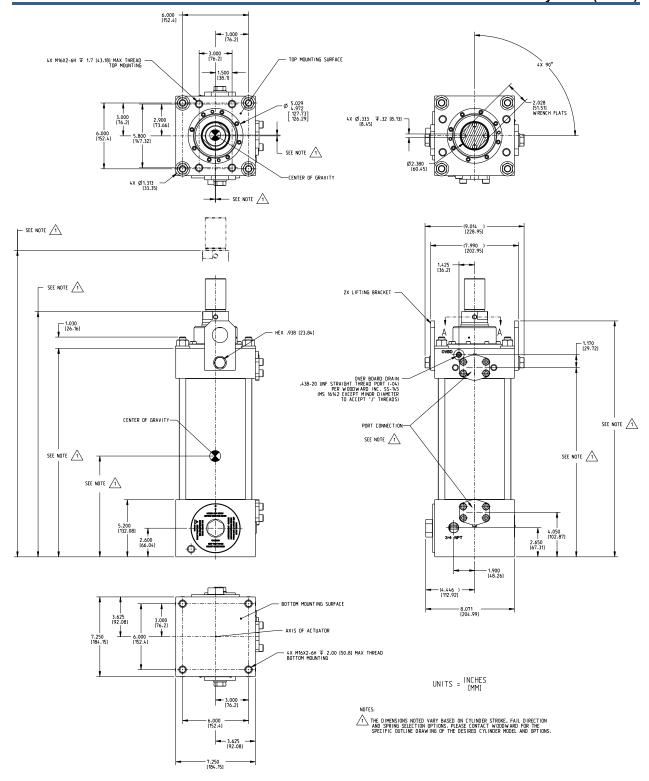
VSPC 6 inch bore, Installation Dimensions for Remote Cylinder
